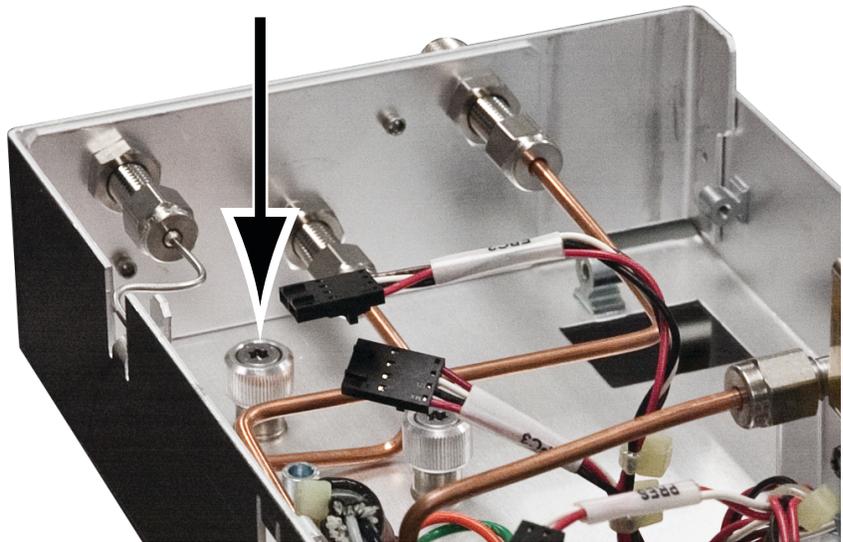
Overhead view of the back thumbscrew securing the pneumatics assembly
